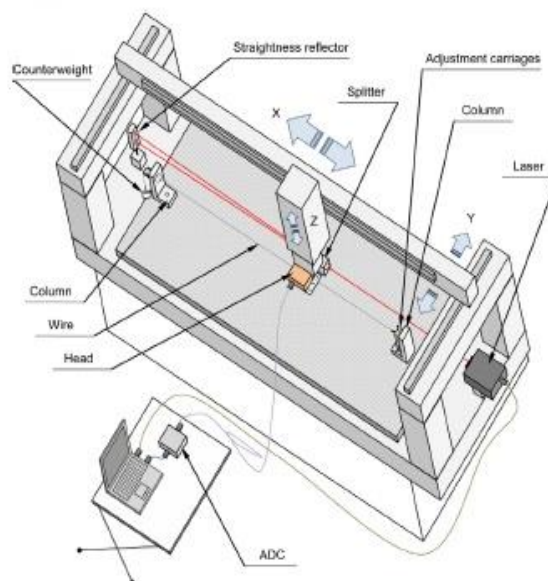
Taut wire system and laser interferometer used for evaluation setup on the machine.
